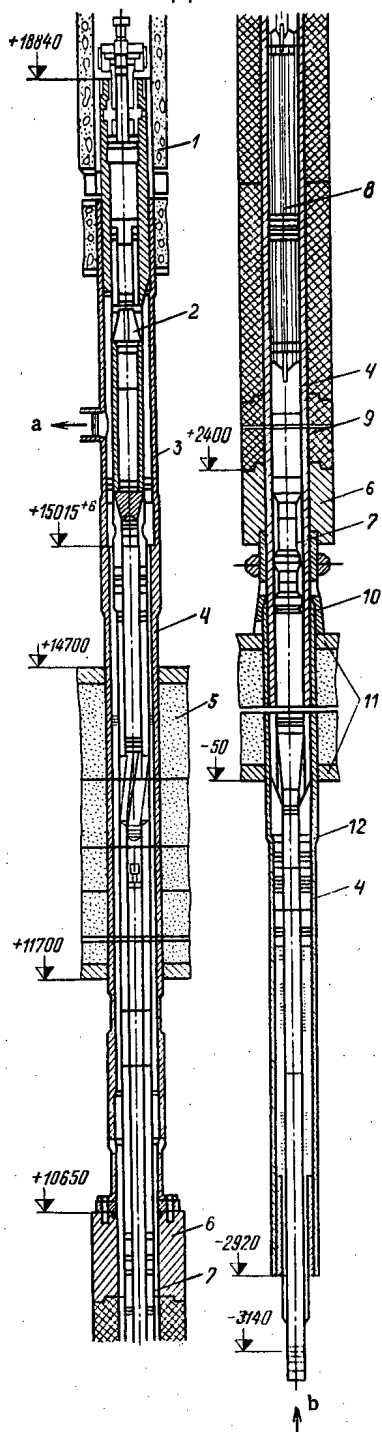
A fuel channel: 1) protection unit; 2) FA suspension; 3) FC head; 4) pressure tube; 5) upper protection plate; 6) thermal shield; 7) steel-zirconium joint; 8) FA; 9) stack block; 10) supporting vessel; 11) lower plate; 12) channel section; a) steam-water mixture outlet; b) water inlet.
